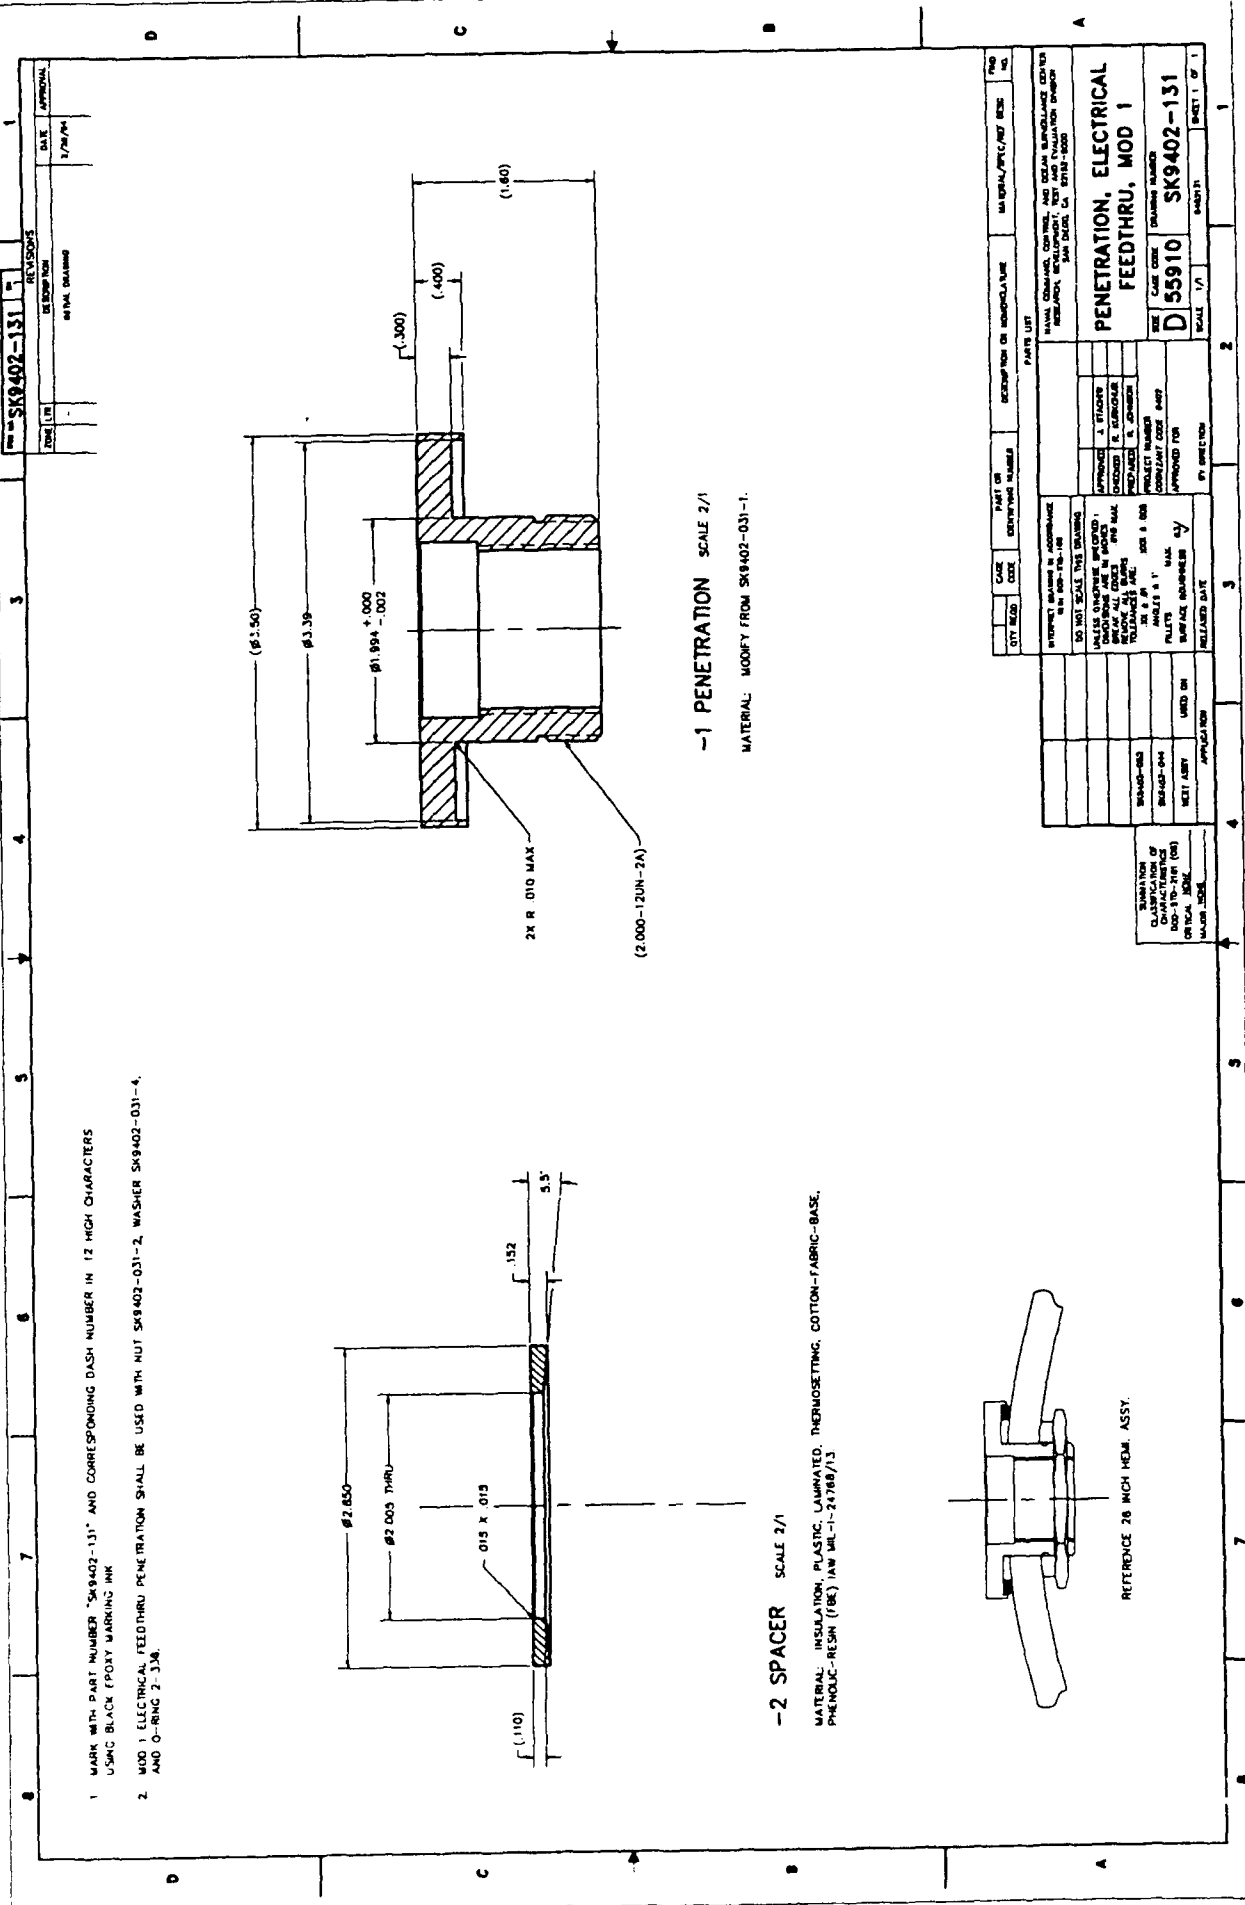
Modified design of the electrical connector insert for the forward head assembly.
